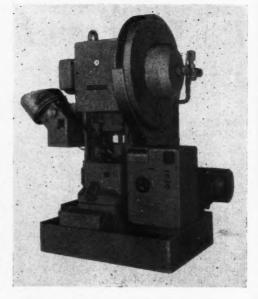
Following annealing, partly-formed nut blanks are delivered to this Hatebur type PKZ-1 multiple-station press for finish forming
